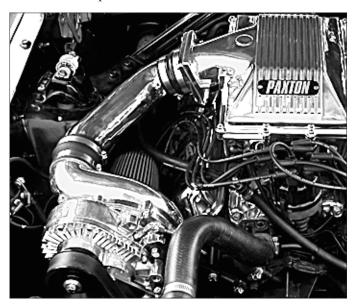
a / Passenger side discharge tube. ('64-'68 Mustang)
